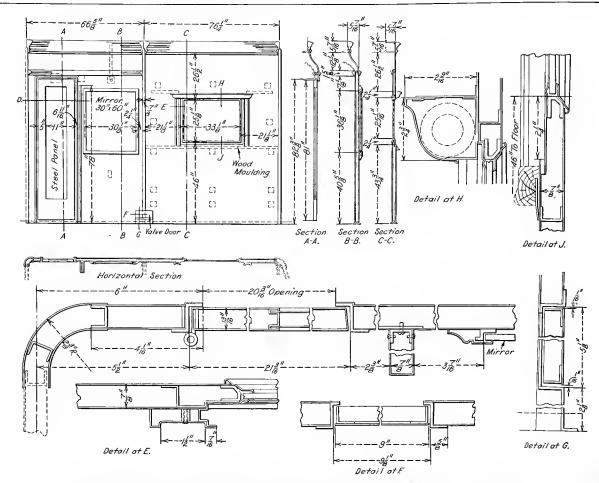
Steel Lavatory Partition and Details. Dahlstrom Metallic Door Company.
